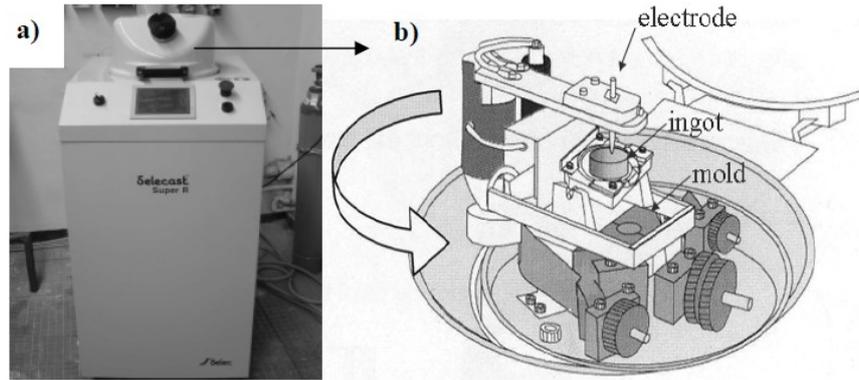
a) Centrifugal casting machine, b) schematic of the casting chamber
